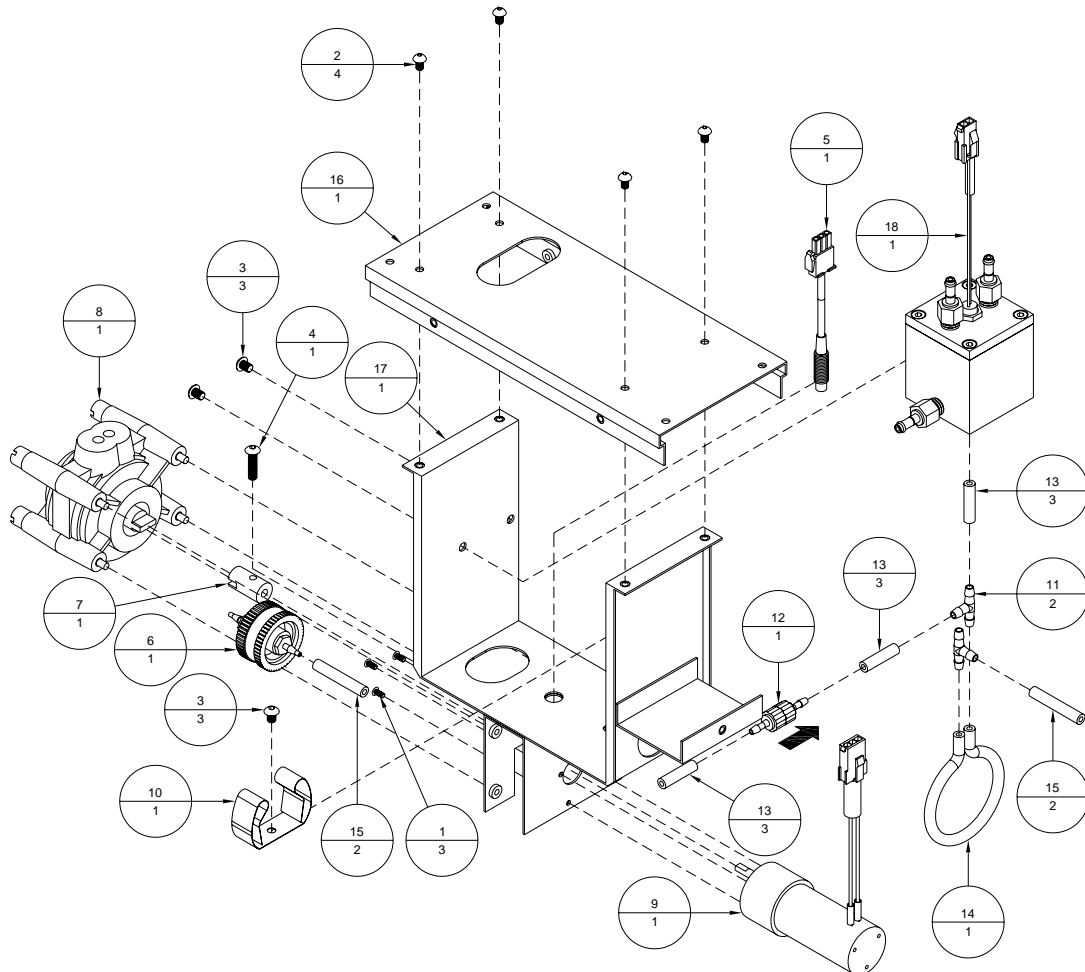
Atlas Pumping Subbracket Assembly (9103016A)
